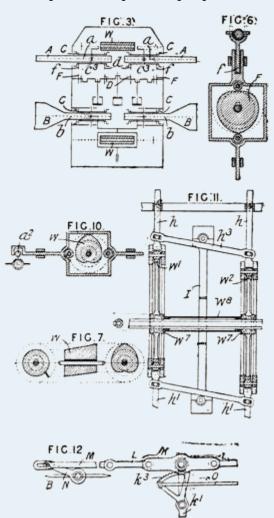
concentrates on the wings, marked A and B, shafts marked a and b turning in sleeves marked C provided with ball bearings. Fig 6 shows the arrangement of the cam used to propel the wings. An axial rocking motion is given to the wings, without interfering with their beating motion, by cam W acting on the bearing a^2 in Fig 10. The cam is shown separately in Fig 7. Fig 11 shows how, by the use of cams, the blades could be set to dip forwards or backwards during the stroke, causing the machine to move forwards or backwards. The wings (B) could also be fixed in a horizontal plane to act as brakes, by means of the device shown in Fig 12.
